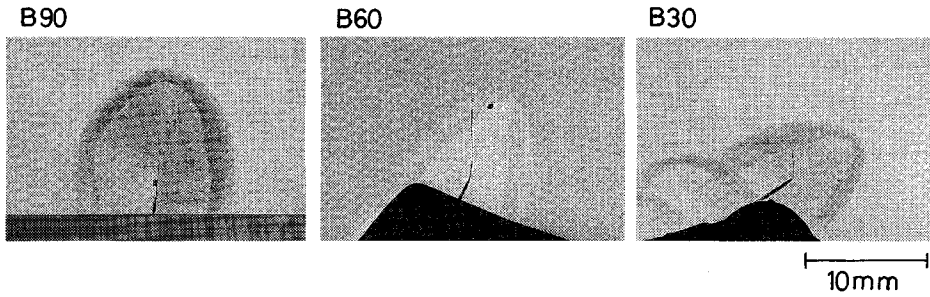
Photographs of weld cracks and fatigue cracks.
